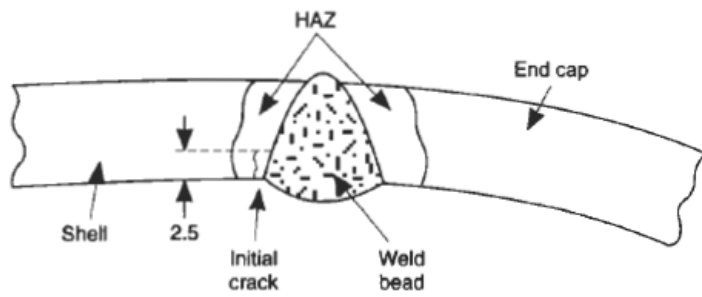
The geometry of the failure. Dimensions in mm.
